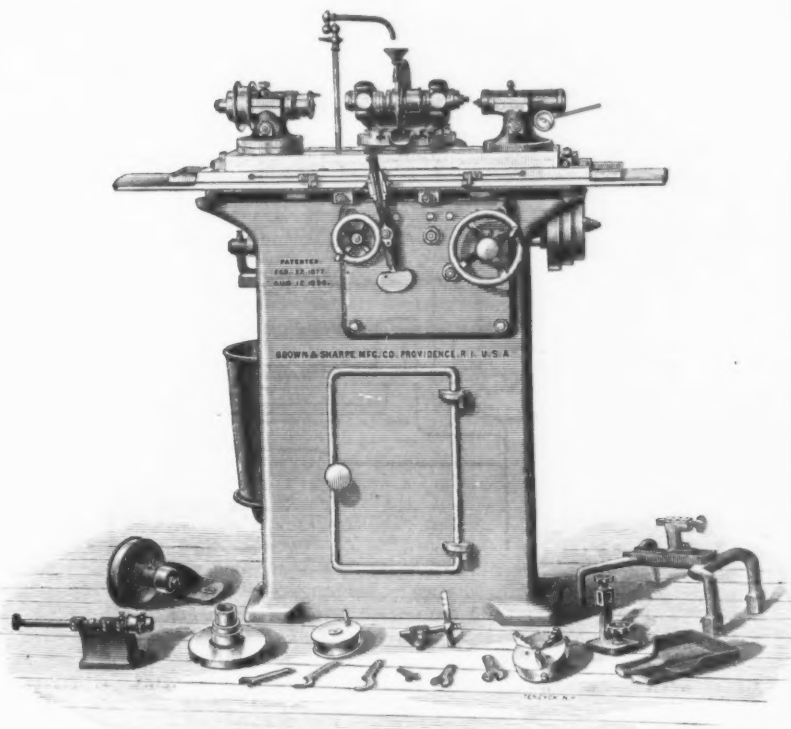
No. 1 Universal Grinding Machine.—Front View.
